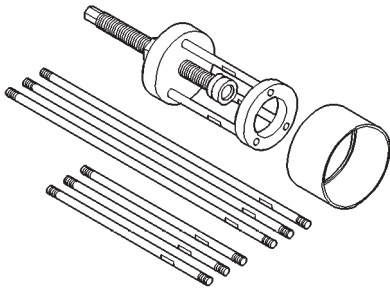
Crankshaft Sprocket Puller Tool 6444
